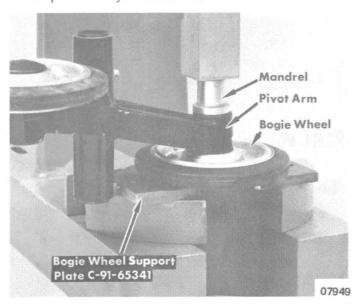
Pressing Bogie Wheel on Tubing or Arm
